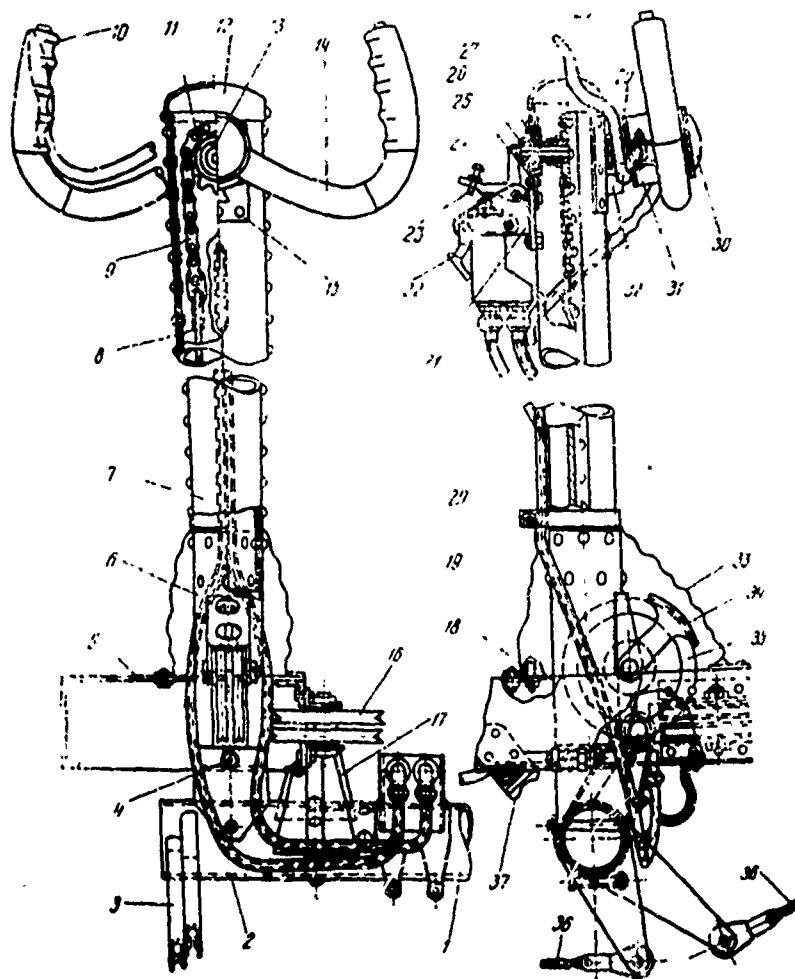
Control column (left): 1 - duralumin cross tube 60 × × 57 mm; 2 - steel joint (end bracket); 3 - elevator control levers; 4 - tapered coupling bolt of the control column to the vertical sleeve; 5 - left load-bearing beam of the cockpit floor; 6 - control column bracket; 7 - control column; 8 - aileron control cable; 9 - bush-roller chain (roller chain); 10 - rubber tip of the control wheel grip; 11 - toothed gear of control wheel axle (sprocket); 12 - cap of control column; 13 - spline; 14 - control wheel; 15 - rear bracket of the control wheel axle; 16 - aileron control rollers; 17 - mounting bracket of cross tube; 18 - upper stop of control column; 19 - air lines of brake system; 20 - attachment yoke of the control column cover; 21 - bracket of PU-7 reducing valve; 22 - parking brake catch; 23 - limiting screw of movement of the clamping lever of PU-7 valve; 24 - clamping lever of PU-7 valve; 25 - front bracket of the control wheel axle; 26 - control wheel axle; 27 - rod; 28 - wheel brake control trigger button; 29 - washer of the control wheel axle; 30 - cap of the control wheel drum; 31 - control wheel drum; 32 - limit stop of control wheel; 33 - cover; 34 - safety lock; 35 - aileron control rollers; 36 - elevator control cables; 37 - bottom stop of control column.
